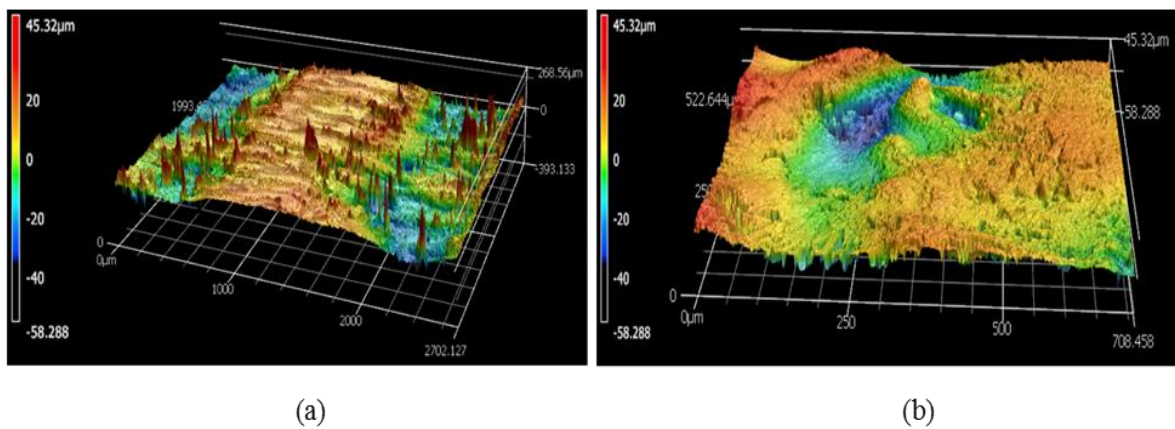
11: 3D photographs of the finished surface of Inconel sample (a) before and (b) after finishing process.
